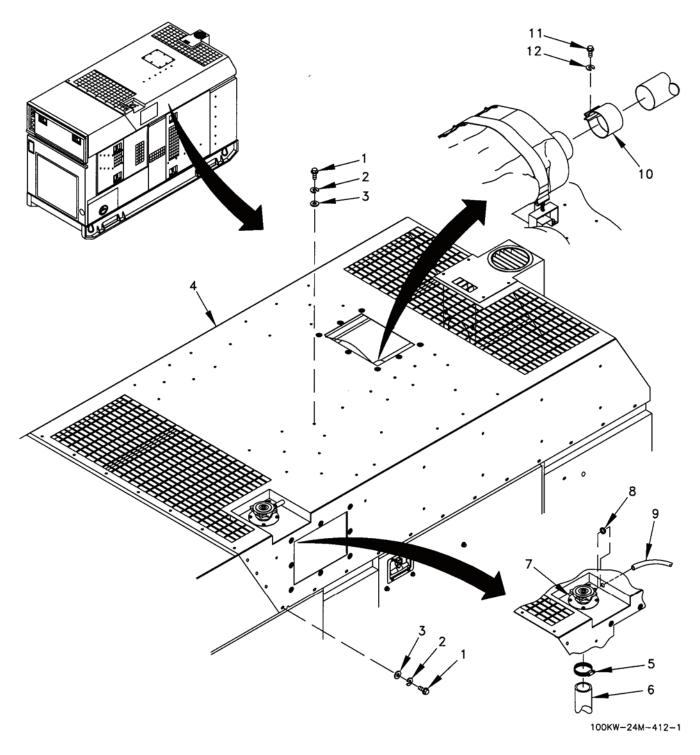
Front Roof Section Housing Assembly (Sheet 1 of 2).
